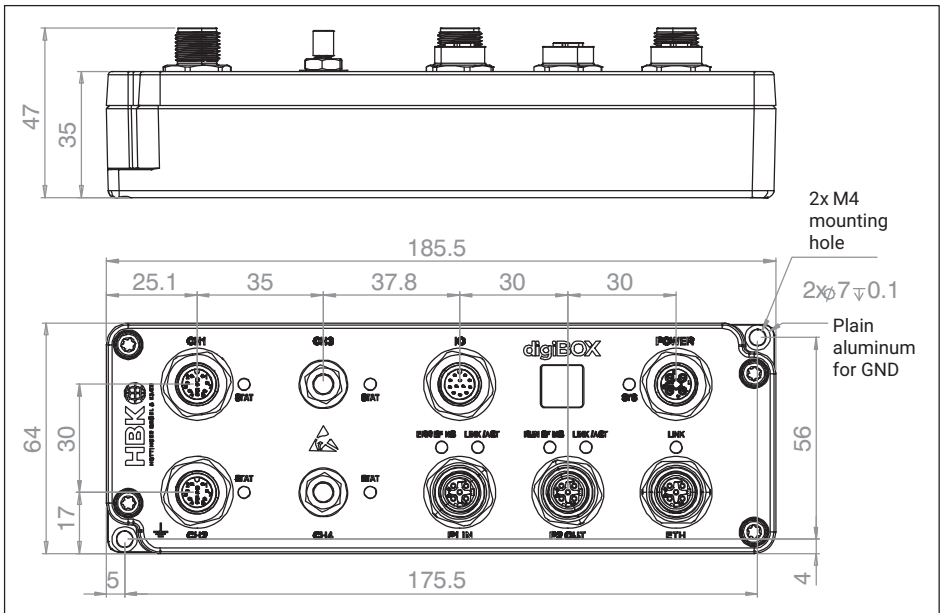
digiBOX Industrial technical drawing (configuration shown: K-DBX-4M-AD-IE-I-ILT)
